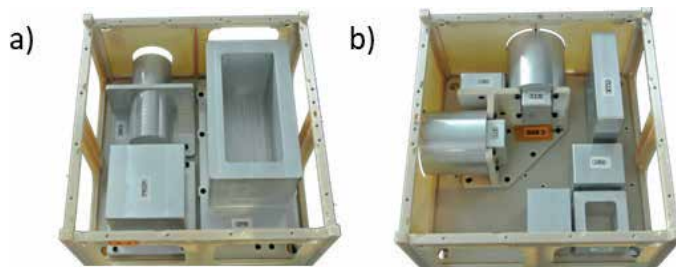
Mock-ups assembled in the 3D-printed structure. (a) Top view and (b) bottom view.
